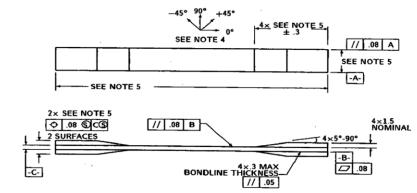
ASTM (D3039/D03039M), Tensile Sample Drawing.
